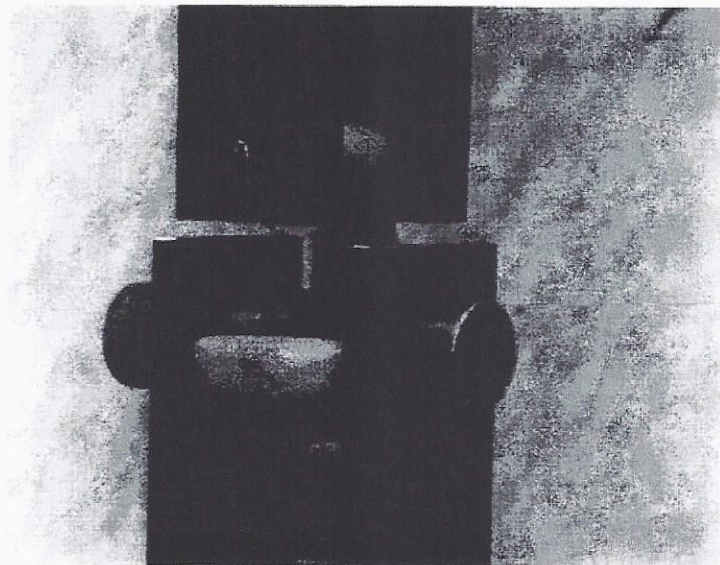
Fixture #1 (sleeve clamp in test jig.)
